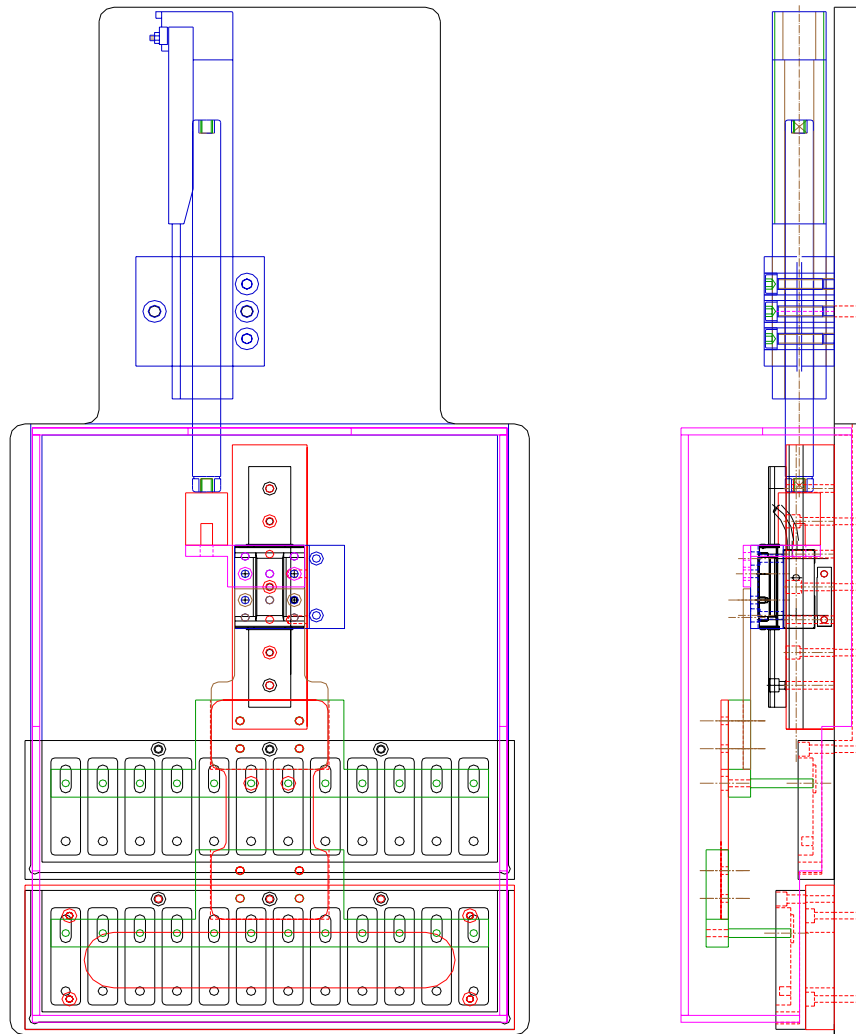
Complete assembly of the oscillatory tensile loading device.
